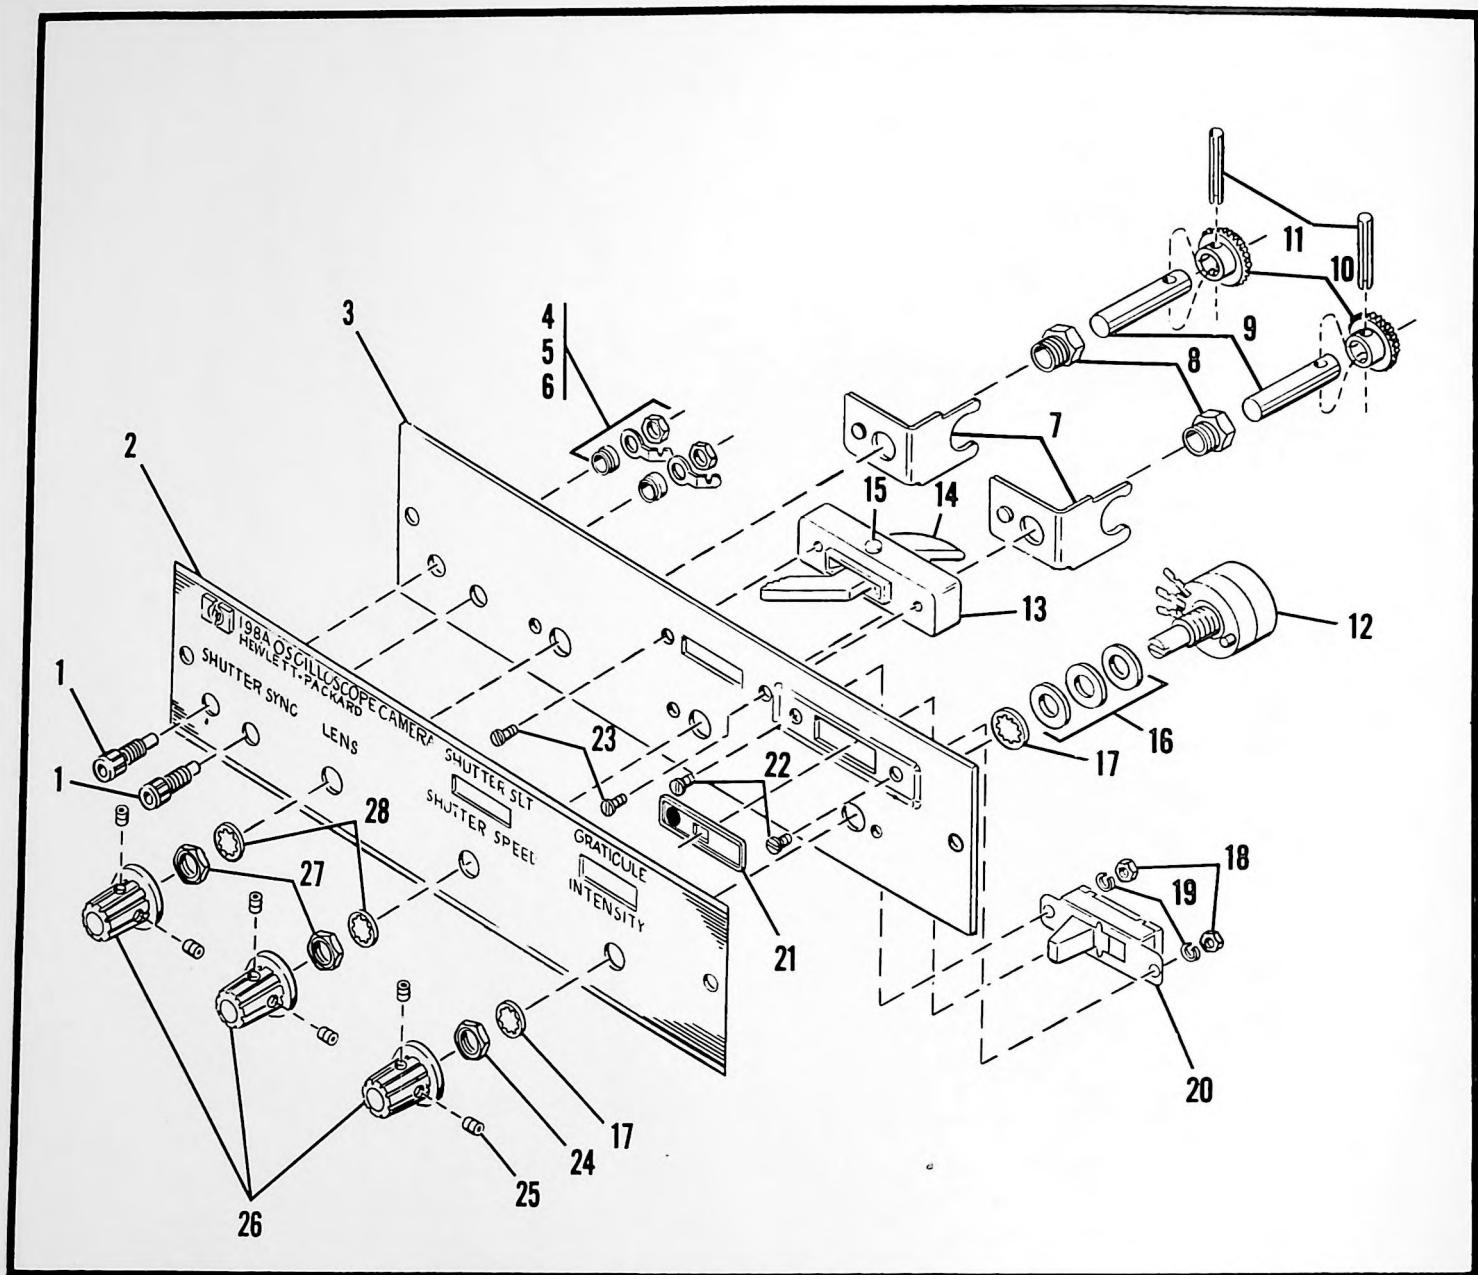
Camera Control Panel Assembly (Sheet 2 of 2)
